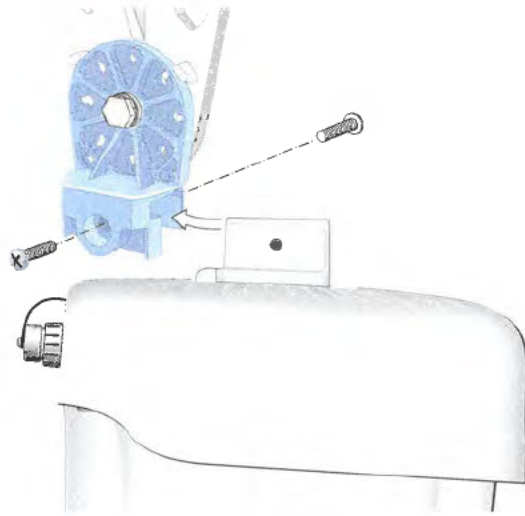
Attaching the AP to the Mounting Holder (Completed)
